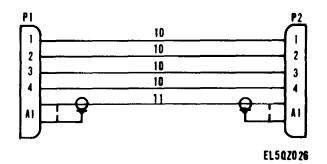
Cable Assembly, Special Purpose, Electrical 217-803031-000 (4W8), Wiring Diagram
